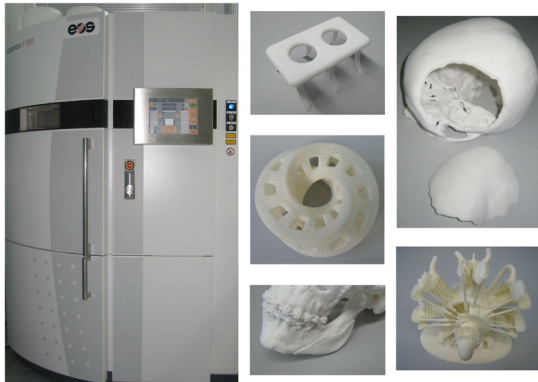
EOS Formiga P 100 Selective laser sintering (SLS) machine with some parts
